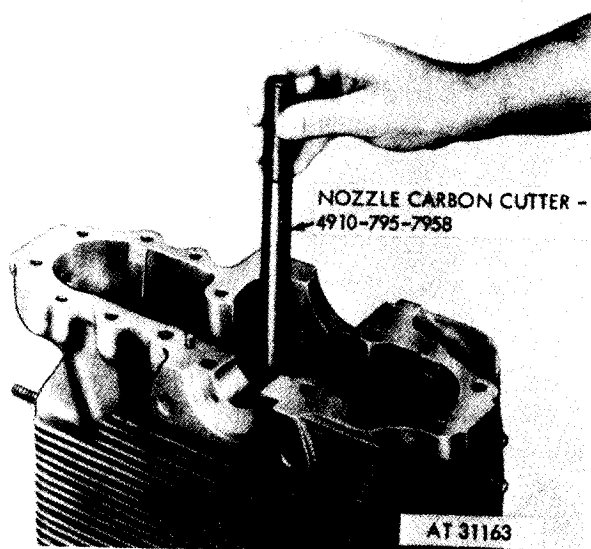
Cleaning carbon deposits from fuel injector nozzle seal using nozzle carbon cutter - 4910-795-7958.
